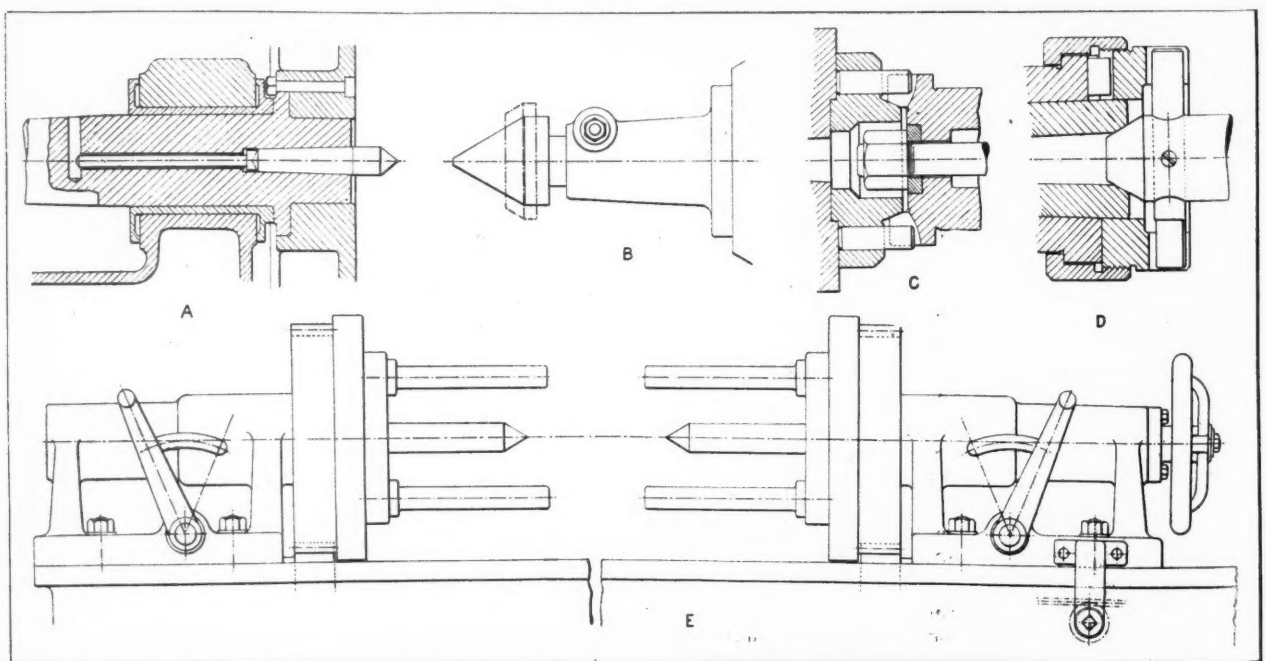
(A) Center provided with Plug Ejector; (B) Enlarged Center for Turret Lathe with Extra Capacity Ring; (C) Stump Center and Driver; (D) Arbor with End formed as Center; (E) Shafting Lathe arranged for Drive at Either End
